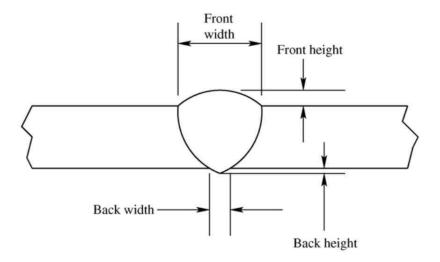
Geometric dimensions of weld bead (Source: Dutta and Prahitar, 2006)
